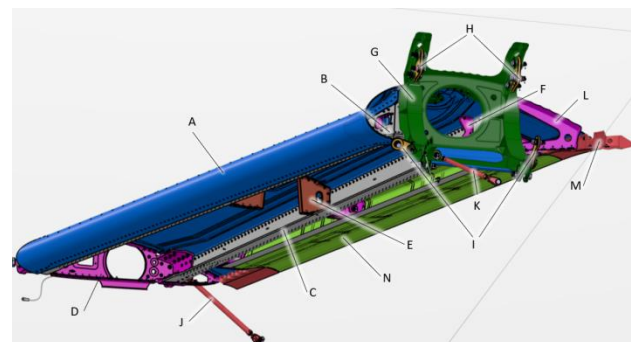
Upper wing arrangement with lower panels, fairings and nacelle removed: (A) Upper cover, (B) Forward spar, (C) Aft spar, (D) Inboard rib and fittings, (E) Mid ribs, (F) Kink brackets, (G) Cradle, (H) Tri-plates, (I) Thrust and torque links, (J) Fuse Strut, (K) WtW strut, (L) OFW rib, (M) TEM and (N) Upper flap.
